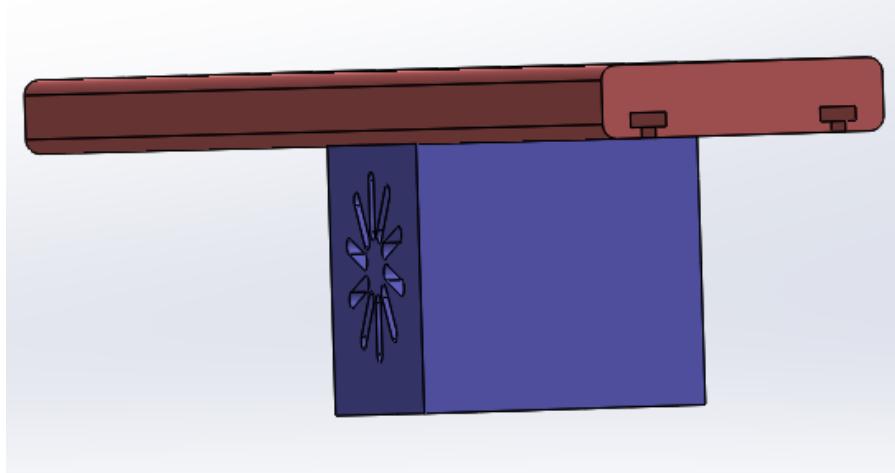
Ferrarer, Auston: Assembly Step 2
